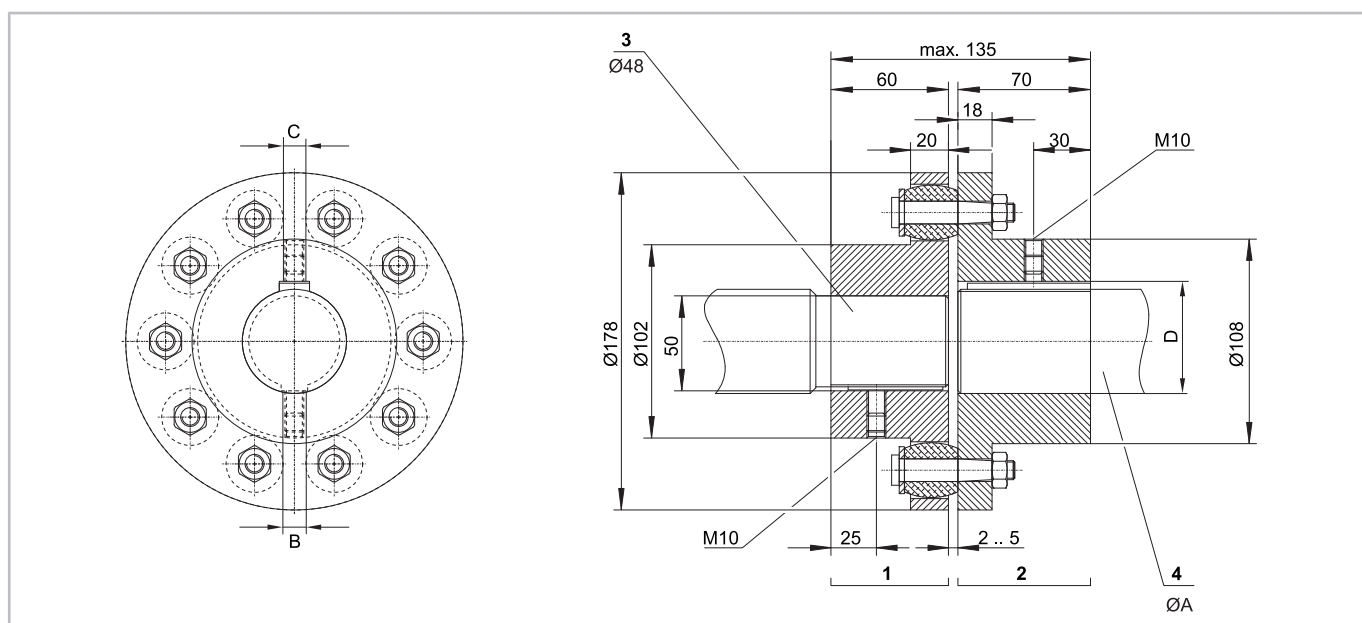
Dimensional drawing of coupling KS731 incl. KS731EX
